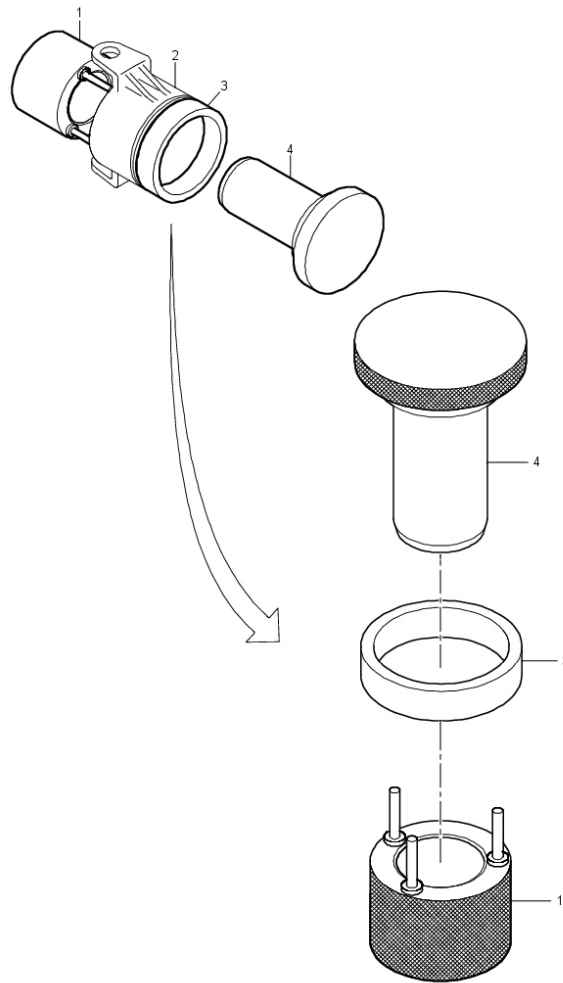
T/R Pitch change slider removal (Sleeve assy P/N 109-0130-94)
